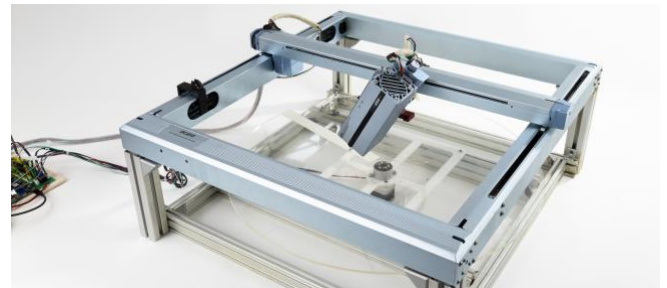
Our hardware prototype of a 5DOF desktop laser cutter
